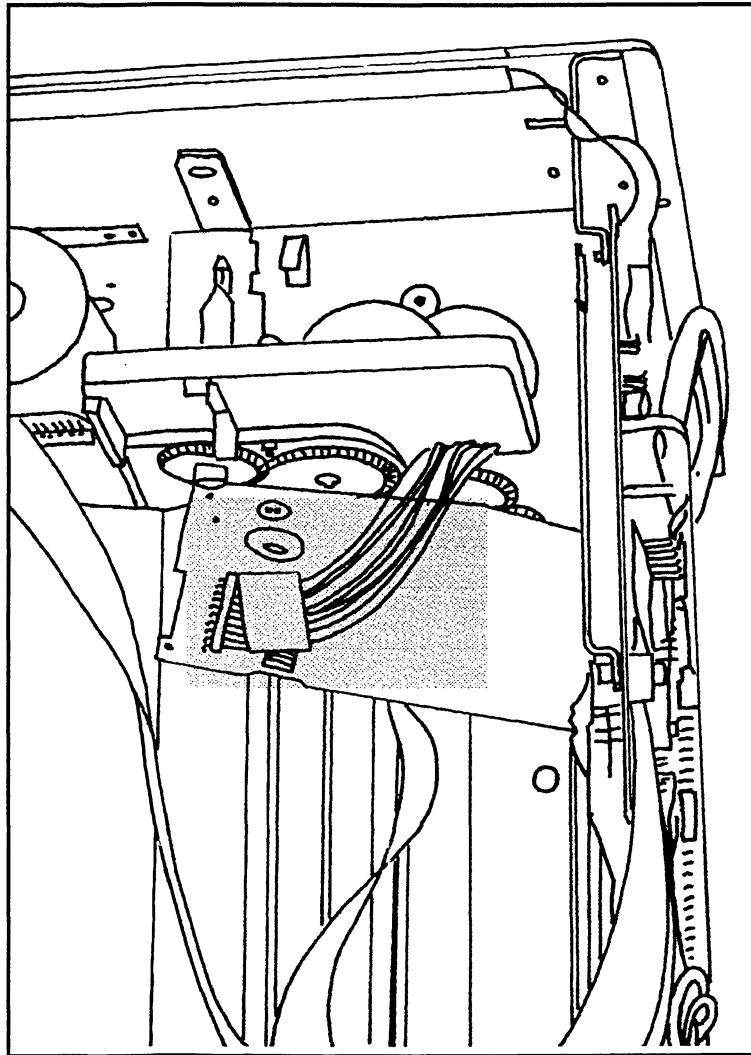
Disconnecting ribbon advance motor wiring. (top view)
